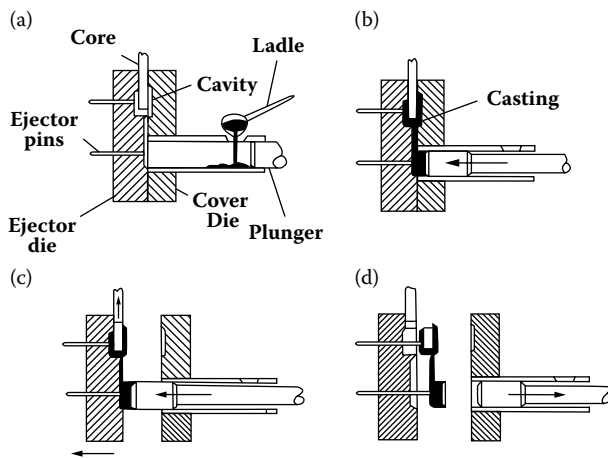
Operating sequence for the cold-chamber, die-casting process. (a) Die is closed and molten metal is ladled into the cold chamber. (b) Plunger pushes molten metal into die cavity. The metal is held under pressure until it solidifies. (c) Die opens and plunger advances to ensure casting stays in ejector die. Cores, if any, retract. (d) Ejector pins push casting out of ejector die and plunger returns to original position
